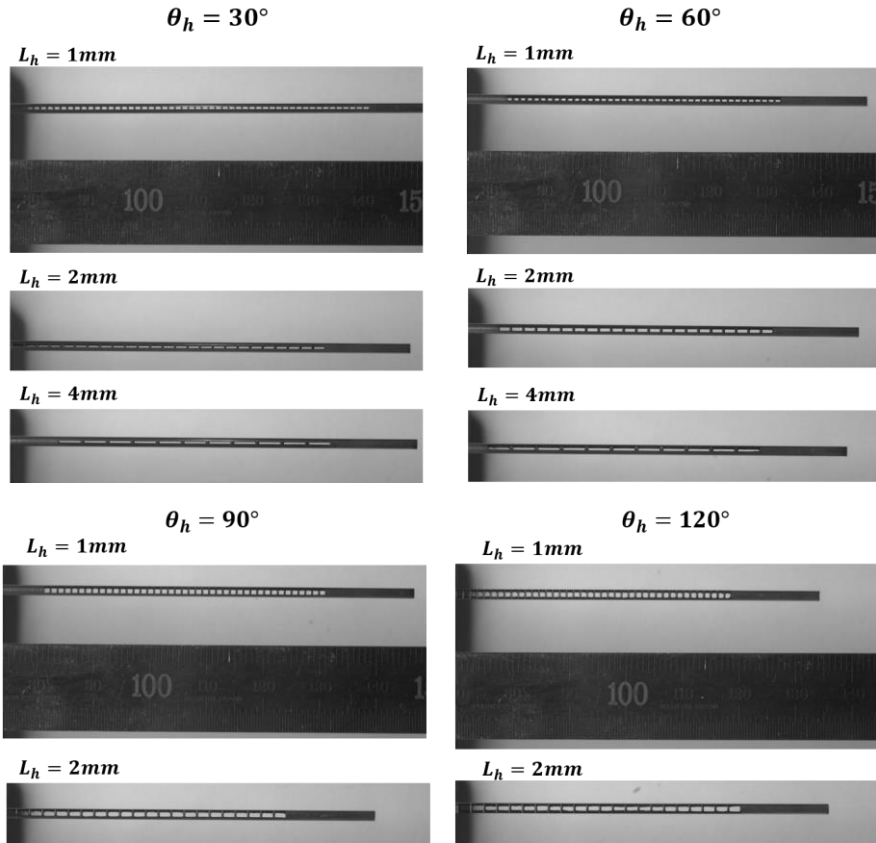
The patterned tubes by picosecond UV laser machining according to design parameters,  $\theta_h$  and  $L_h$
